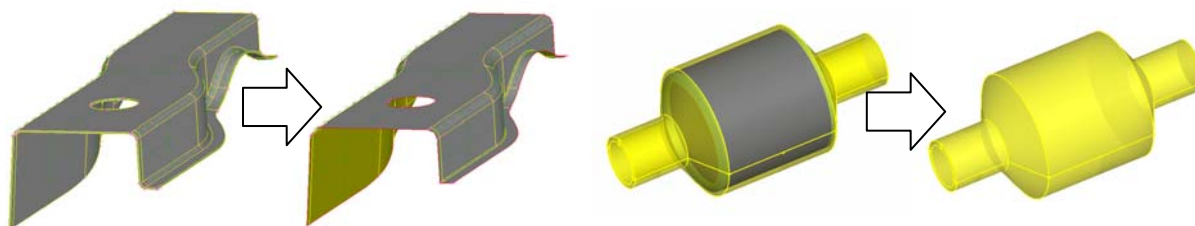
Extraction of outer surface examples in thin parts and thick assemblies
